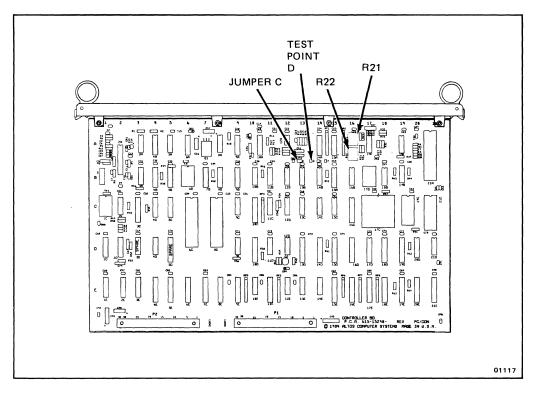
Jumper and Test Point Locations (Controller PCB)
